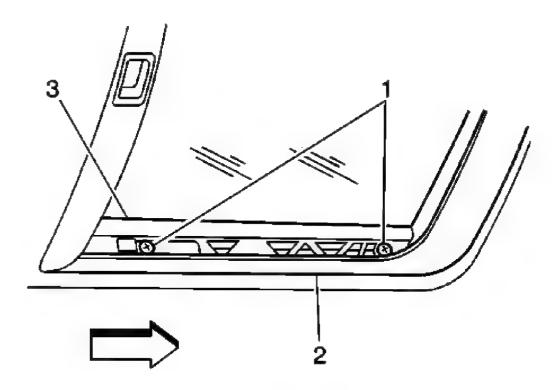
Identifying Sunroof, Housing And Adjusting Screws Courtesy of GENERAL MOTORS CORP.
